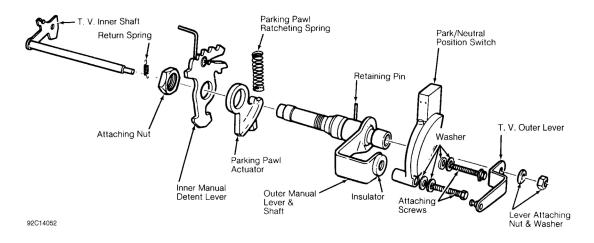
Exploded View of Manual & Throttle Linkage Components Courtesy of FORD MOTOR CO.
